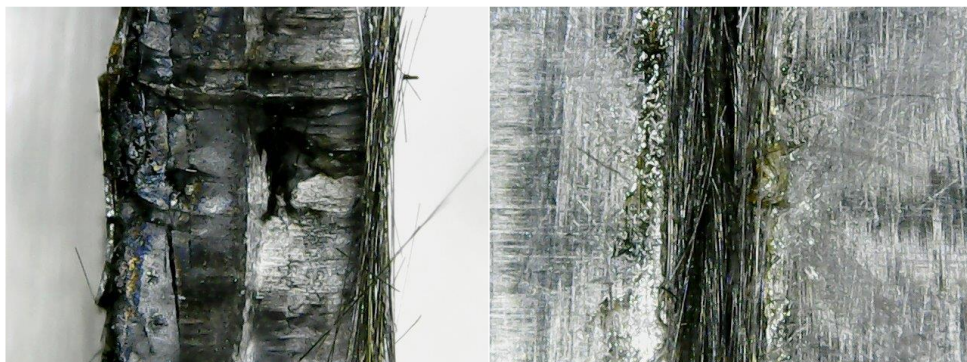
Microscope images of edge side (left) and top side (right) of laser cutting test 53.
